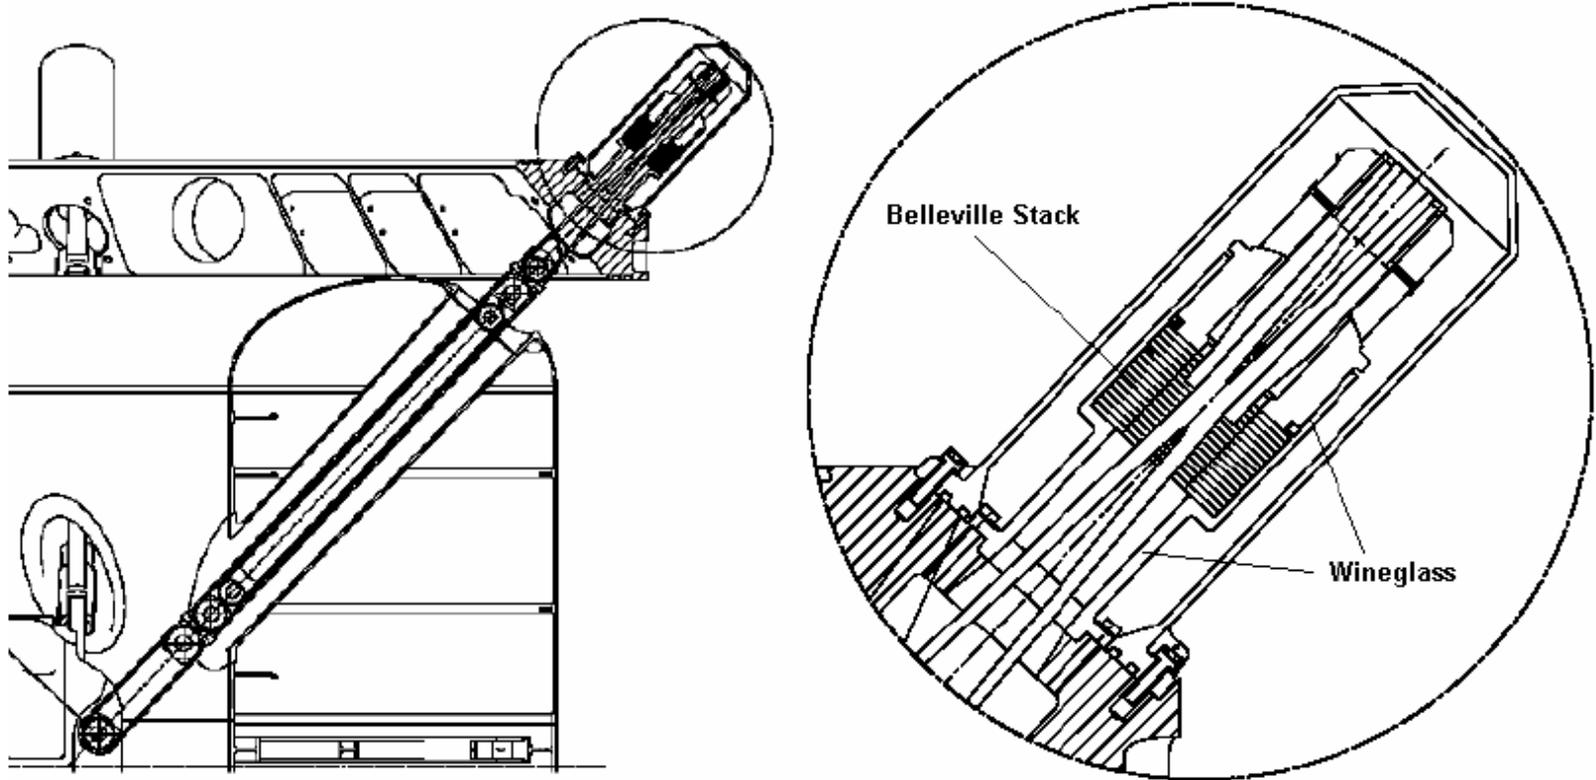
Cross-section of vacuum case showing view of the magnet support strap assembly with a detailed view of items that are external to the vacuum case port
